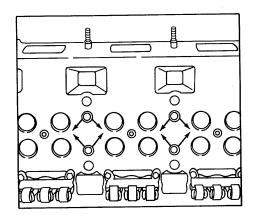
Minimum Distance Between Top and Bottom Faces of Cylinder Head
